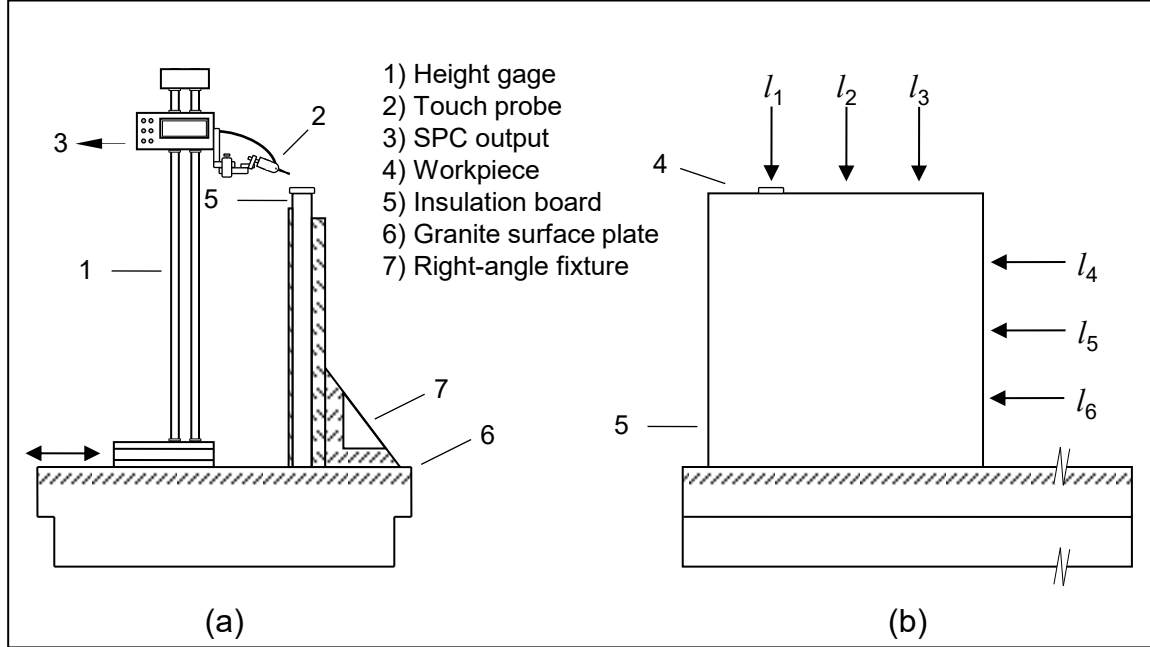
(a) Side view of height gage and right-angle fixture with insulation board clamped between the aluminum jig plate and aluminum sheet. (b) Front view of panel length measurement at locations l_1 .
